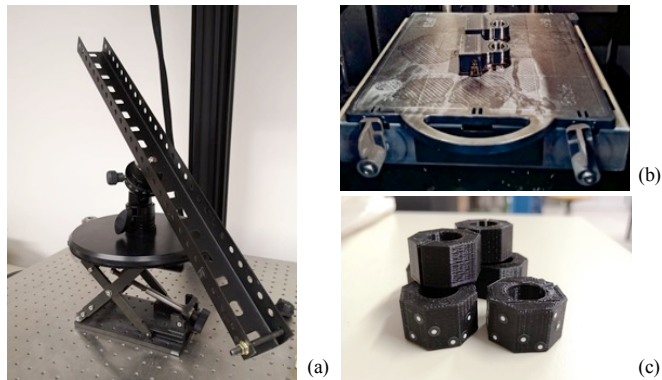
Support elements: (a) metal support plate, (b) 3D printed bearings, and (c) octagonal base prisms.
